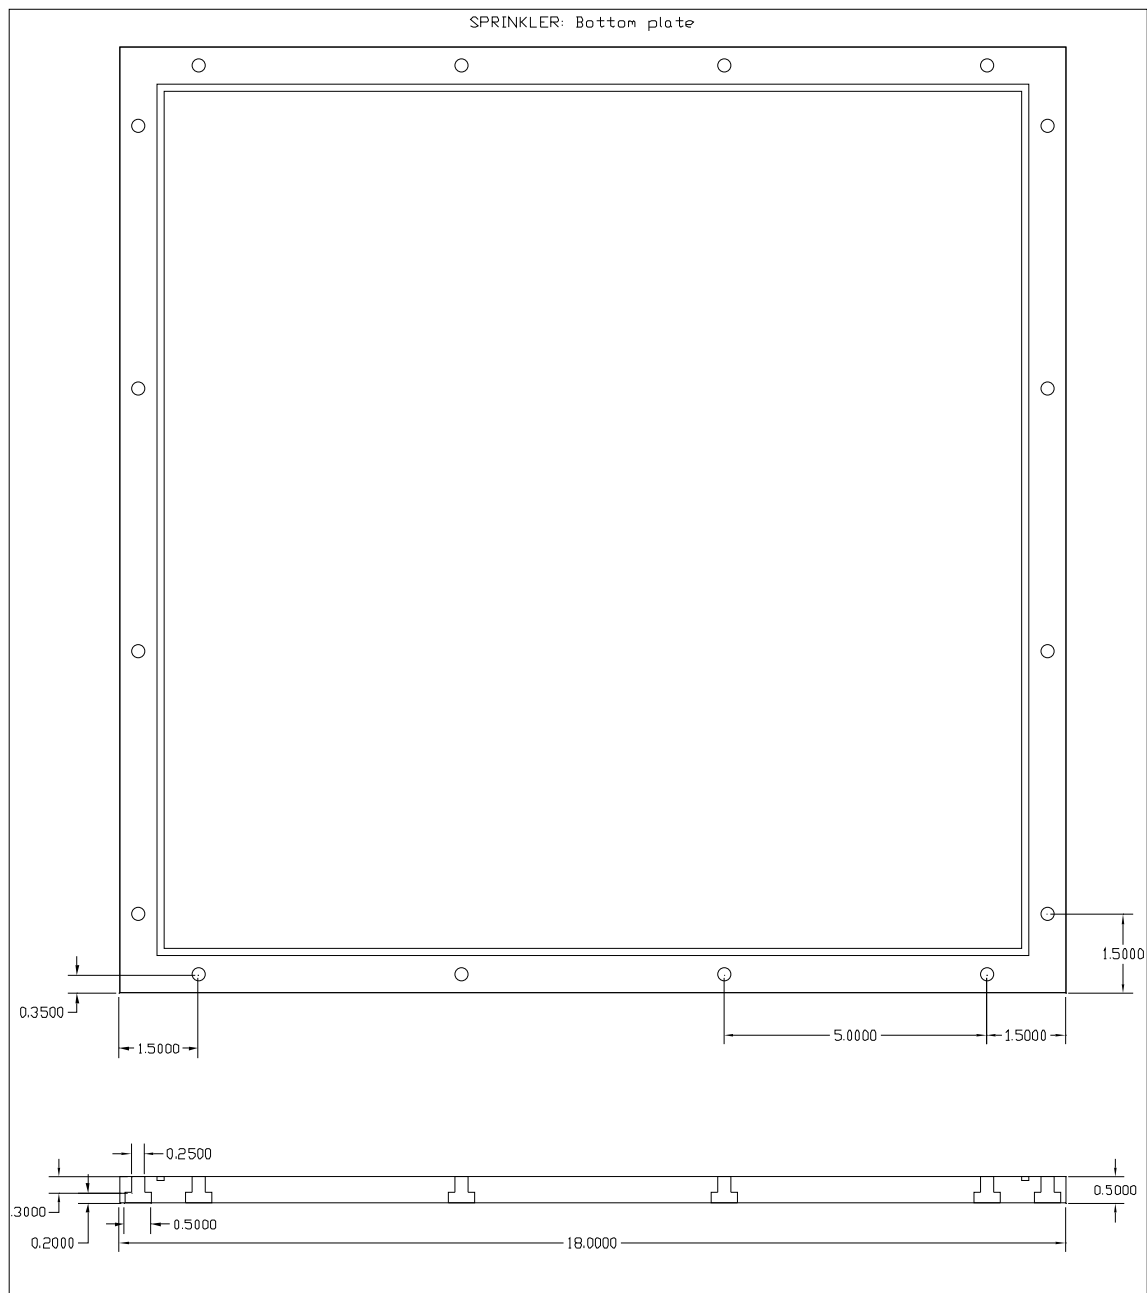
The bottom plate of the Sprinkler. The bottom clearance holes along the edge are counter bored to allow for nuts to be fastened underneath the surface of the plate and to the bolts that hold the Sprinkler together.
